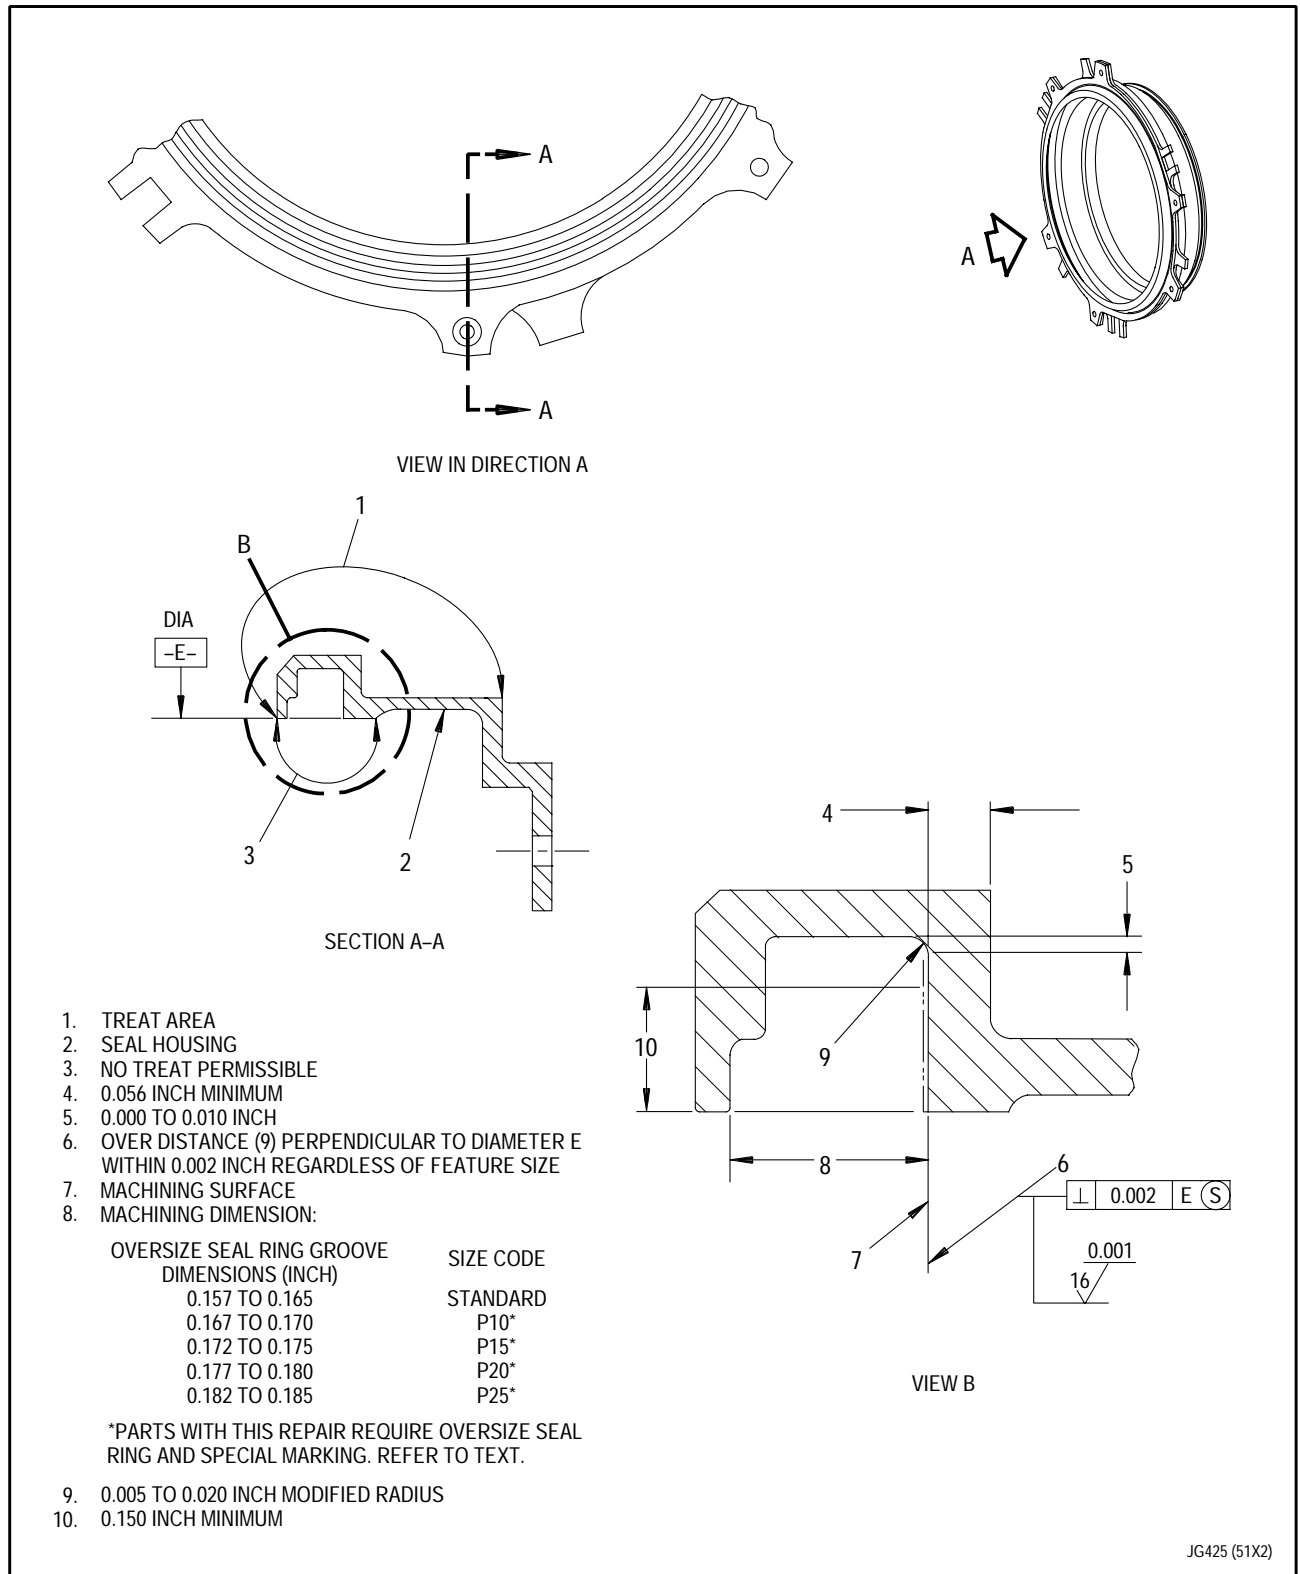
No. 3 Bearing Front Face Seal Assemblies - Piston Ring Groove Repair
